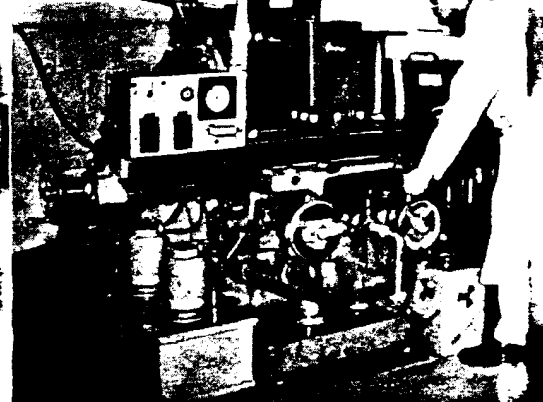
Milling machine with lead shielded radioactive cutting tool arrangement at top center.
